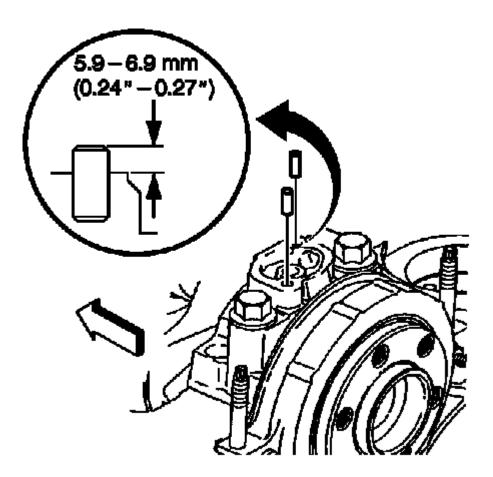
Oil Pump Locator Pins Proper Installation Position Courtesy of GENERAL MOTORS CORP.
